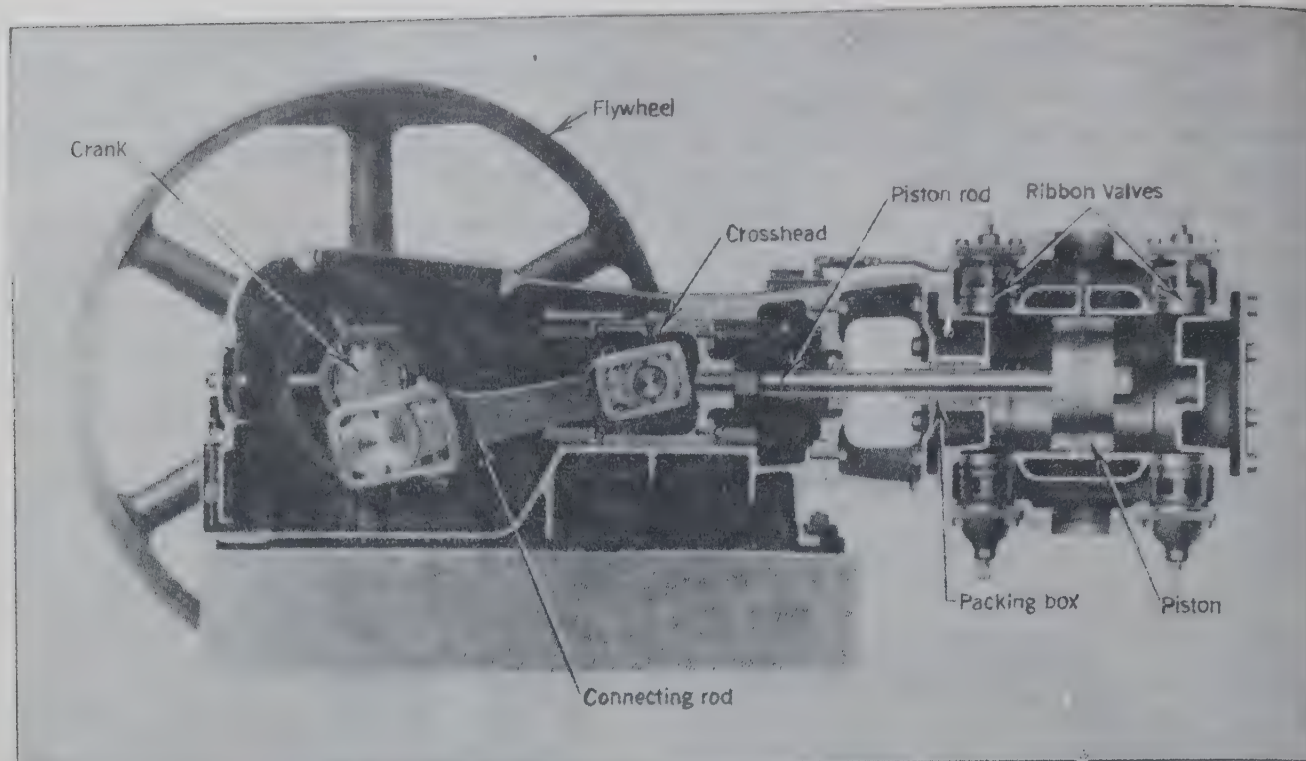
Longitudinal section of crank and flywheel compressor. (*Pennsylvania Pump and Compressor Co.*)
